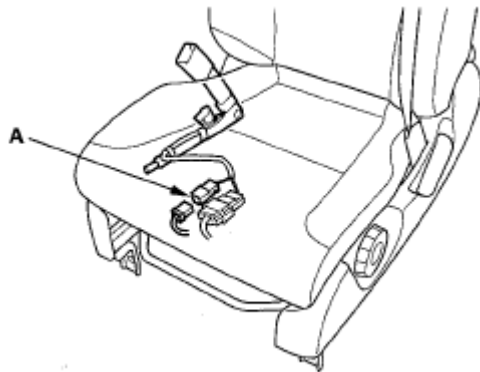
Identifying Driver's Seat Belt Buckle Switch 3P Connector
